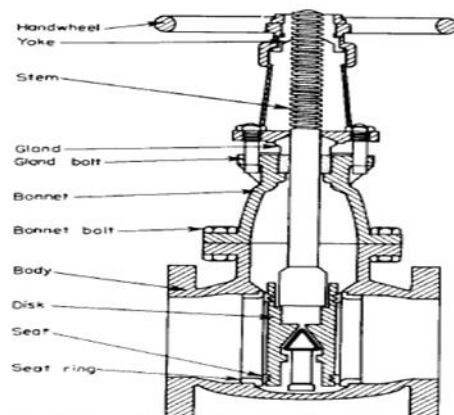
Double-disc rising-stem flanged-end gate valve for 150-psig service.
